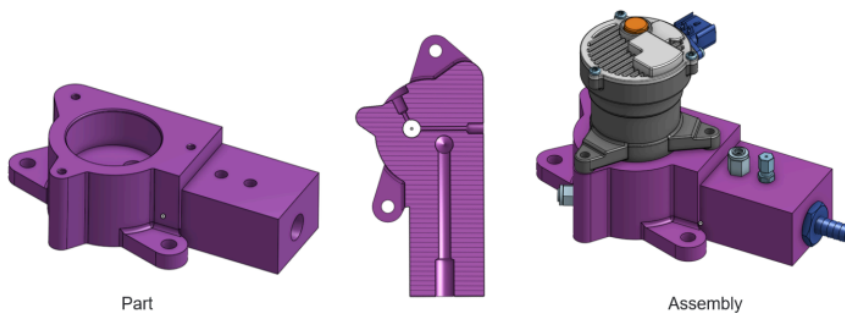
Improved single-piece EOP adapter design for the second EOP tested.
